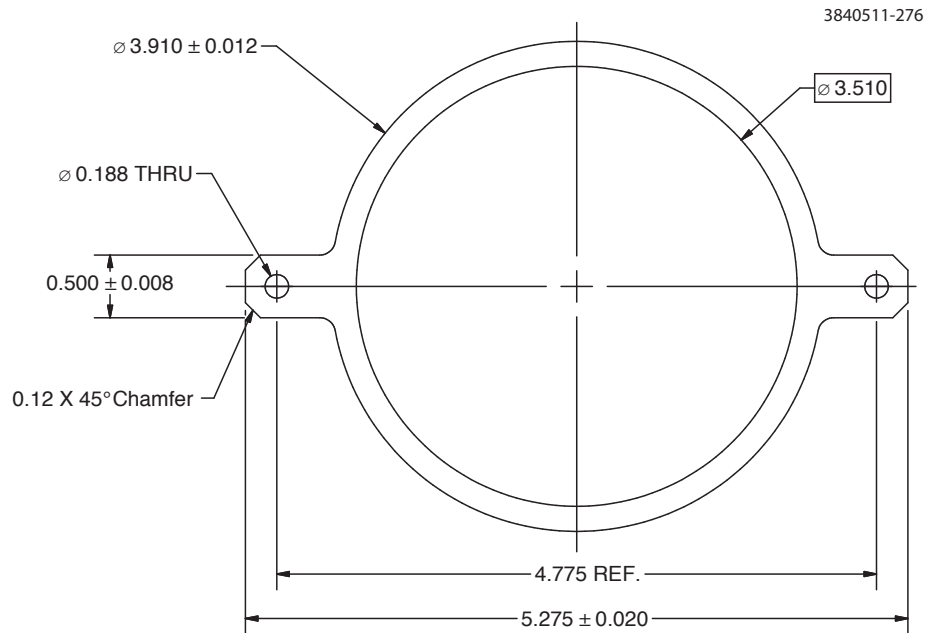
Cross section of PEP-II aluminum beam pipe with a smooth interior wall. The beam pipe was extruded with type 6063-T6 aluminum alloy.
